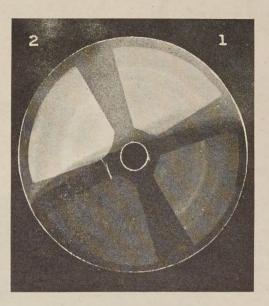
An Exposure Set-up for Determining the Stress due to Welding in a 1-inch Steel Plate. The Pin in the Middle of the Disk is Used to Obtain the Proper Distance between the Object and Film, and is Removed when Making the Negative. A Protractor Helps to Align the Equipment at the Correct Angle, Usually 45 Degrees
